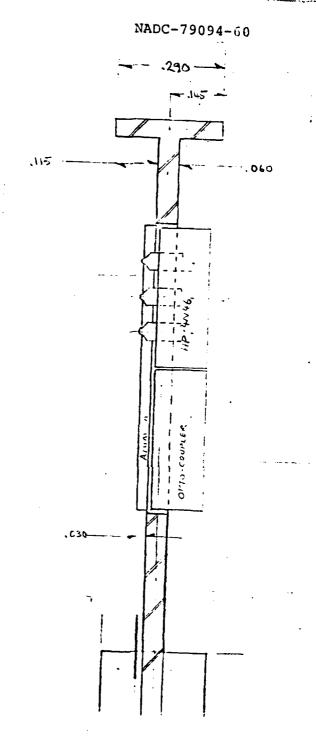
DETAIL OF OPTO - COUPLER MOUNTING ON "T" FRAME.
